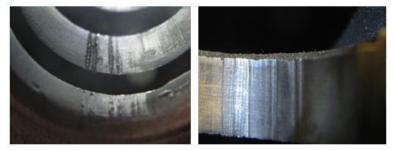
Worn surface of the working belts of the holes of the hydraulic distributor housing
